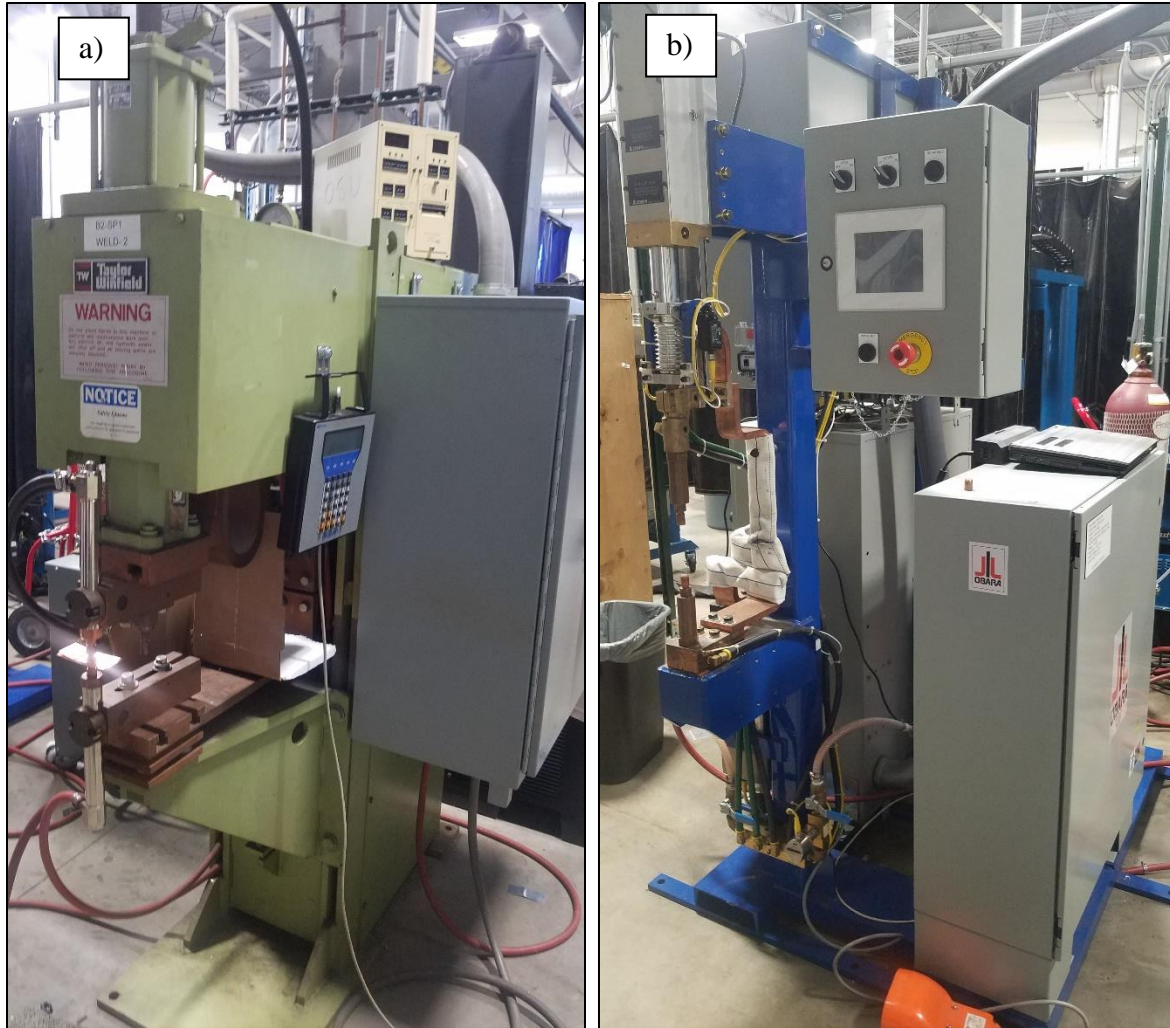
RSW machines a) pneumatic AC RSW b) MFDC RSW
